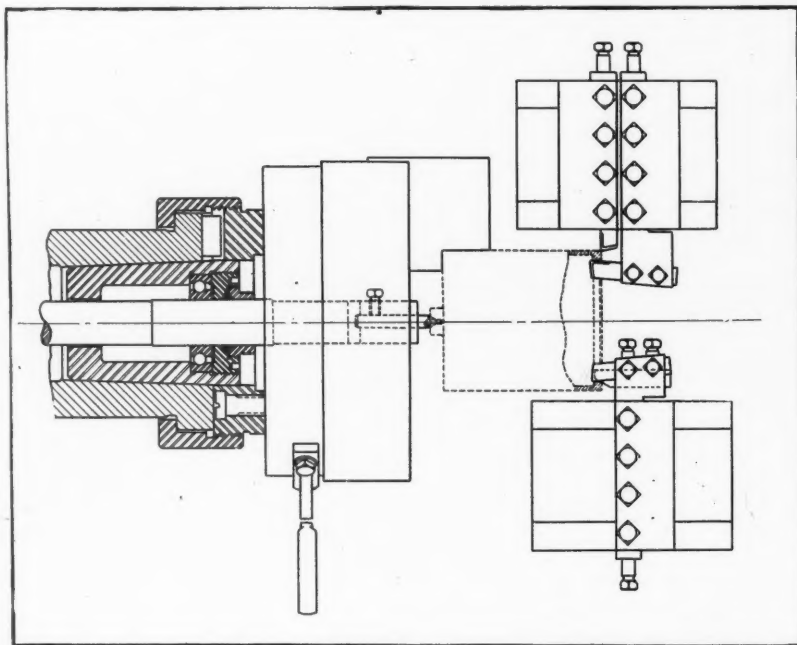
Roughing and finishing Skirt of Aluminum Piston and centering Closed End
